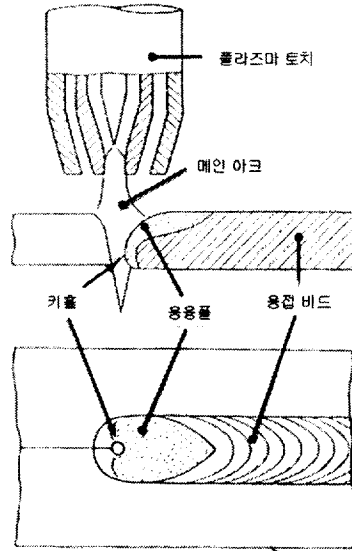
Schematic drawing of plasma keyhole welding
